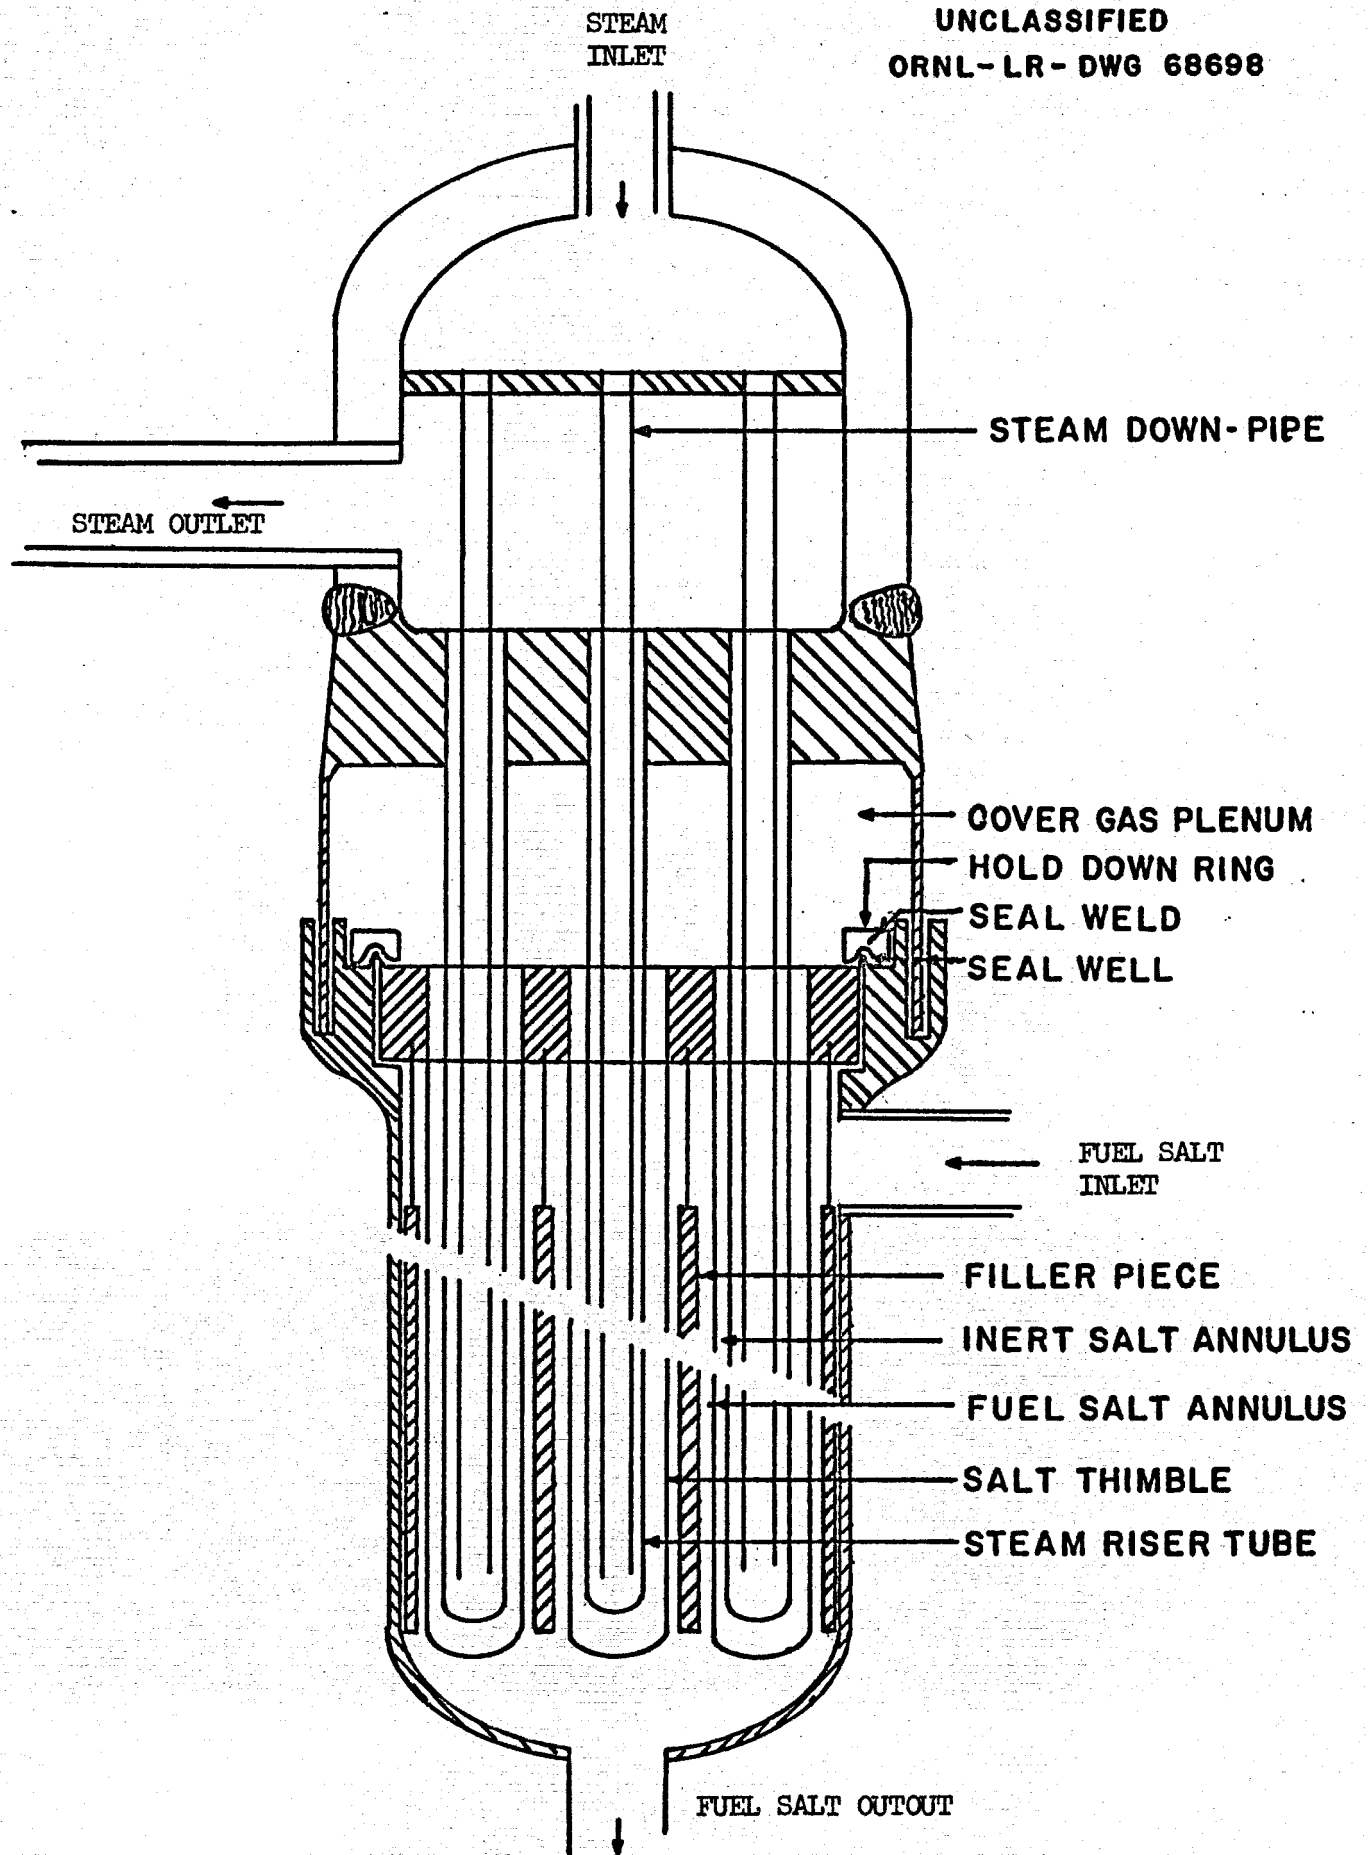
Salt-To-Steam Thimble-Tube Heat Exchanger
